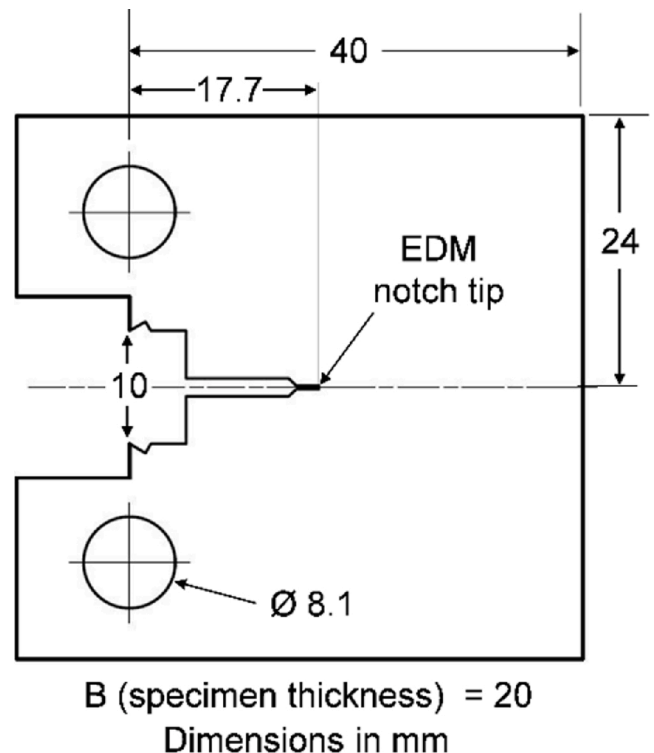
C(T) specimen machining dimensions before fatigue pre-cracking.
